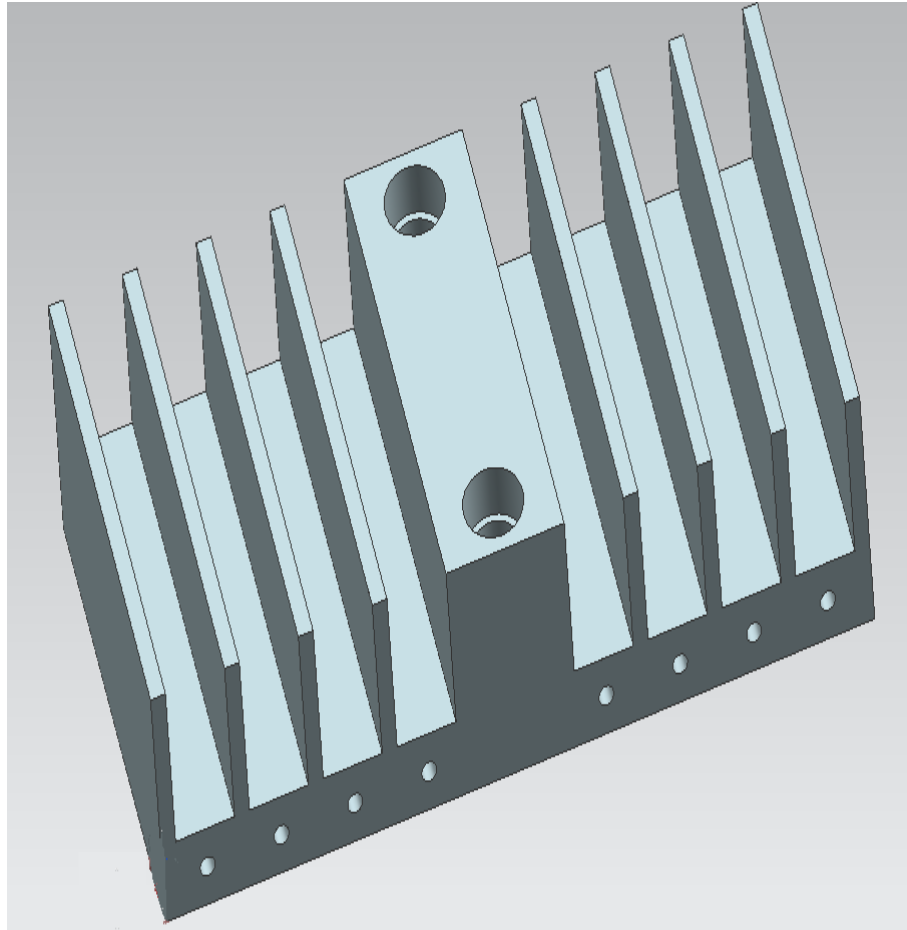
Workpiece design for slot end-milling experiments (Cont.)
